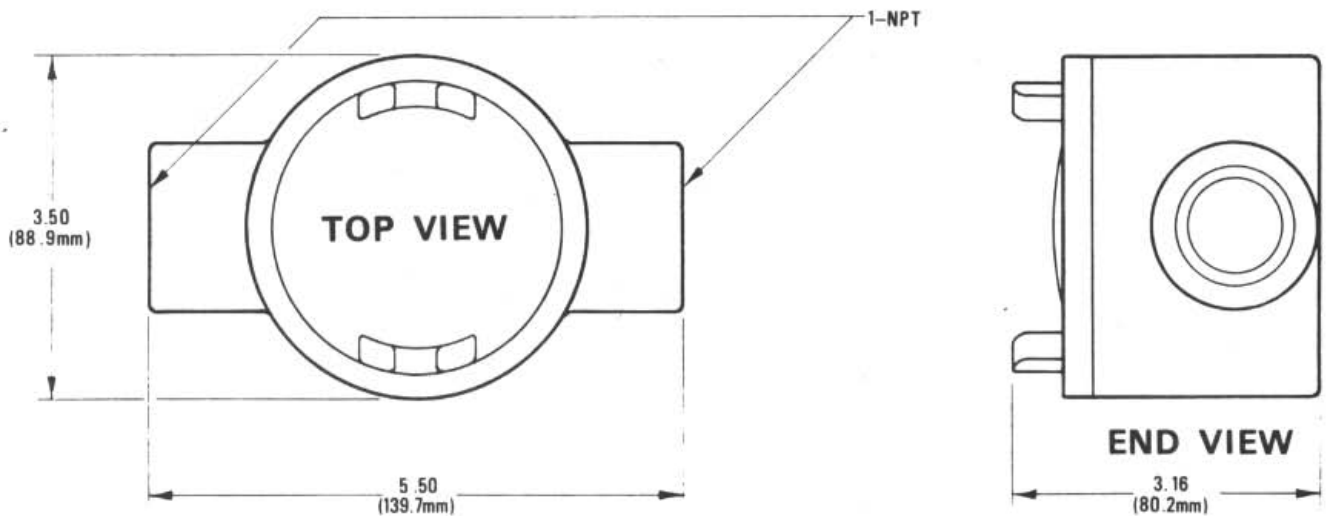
Standard Unit in Explosion-Proof Enclosure, Outline and Dimensions
